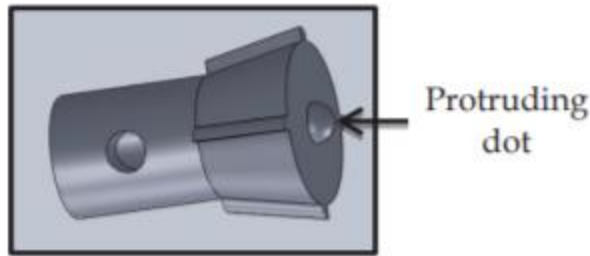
Cutting tool for fully automated rubber tapping machine (Yatawara *et al.*, 2019)
